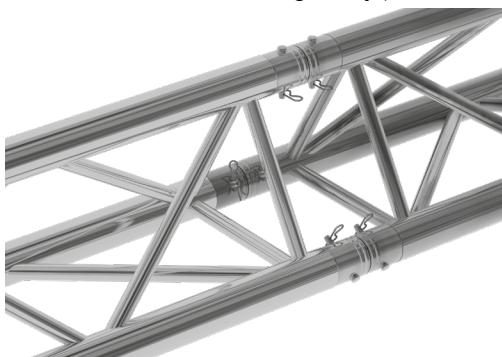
Make sure the connectors are oriented in the right way (larger hole to the larger hole and smaller hole to the smaller hole). Insert the safety pins and adjust the cone connector.
